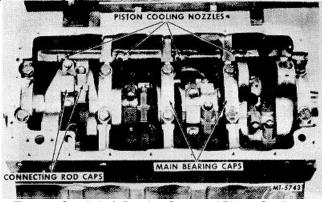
Crankshaft Bearing Caps and Piston Cooling Nozzles
